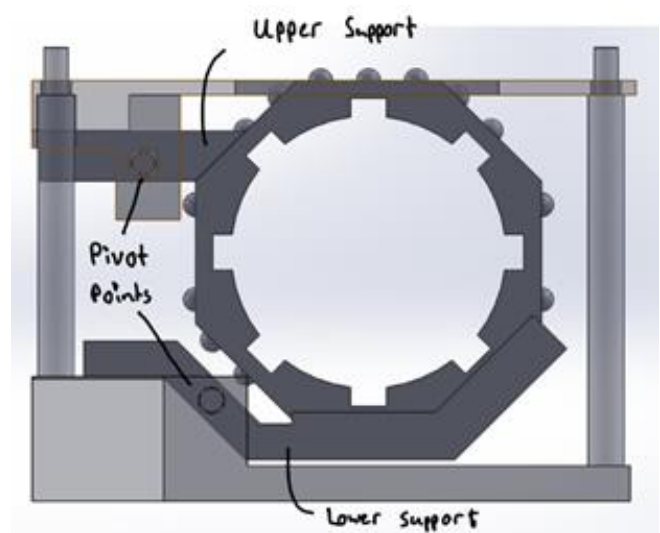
HOUSING DESIGN (SIDE VIEW)
